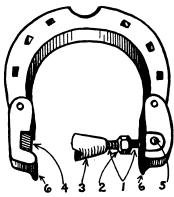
SMITH'S EXPANSION SHOE 1—Screw with fine thread; 2—Nut on screw; 3—Thimble engaging with alot at 4; 5—countersunk rivet; 6—The grip for the bars of the foot.
